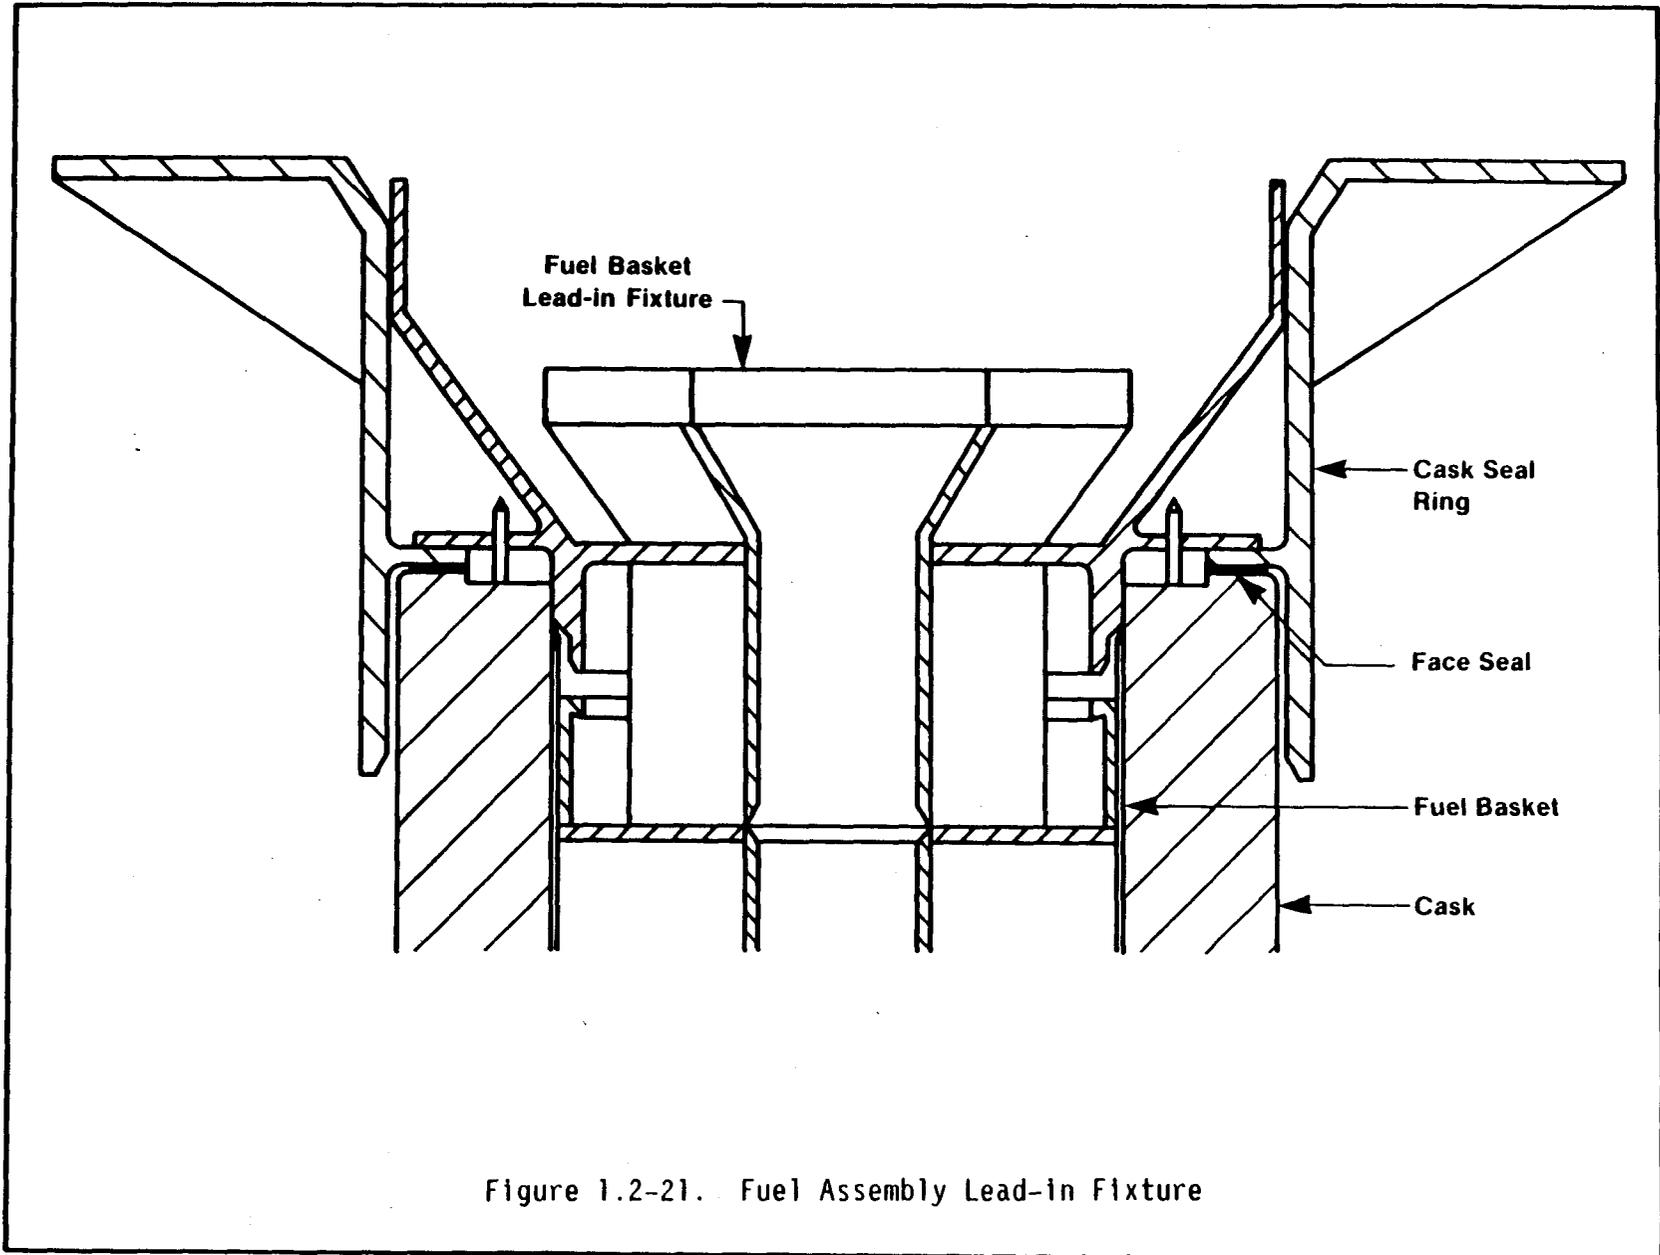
Fuel Assembly Lead-in Fixture
